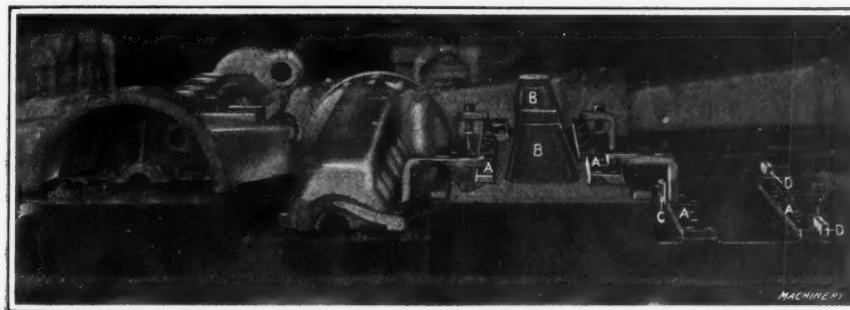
Fixtures used to hold Work while milling Top Face of Crank-case and Ends of Flywheel Housing and Gear-case
